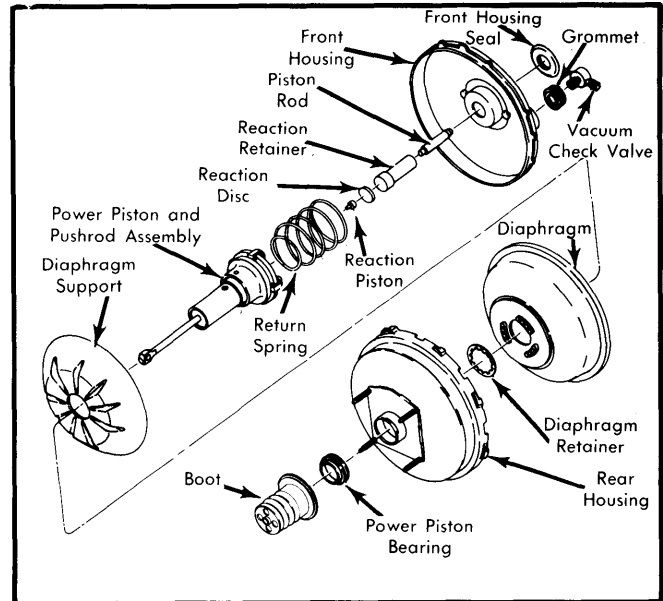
Exploded View of Typical Delco-Moraine Single Diaphragm Power Brake Unit
